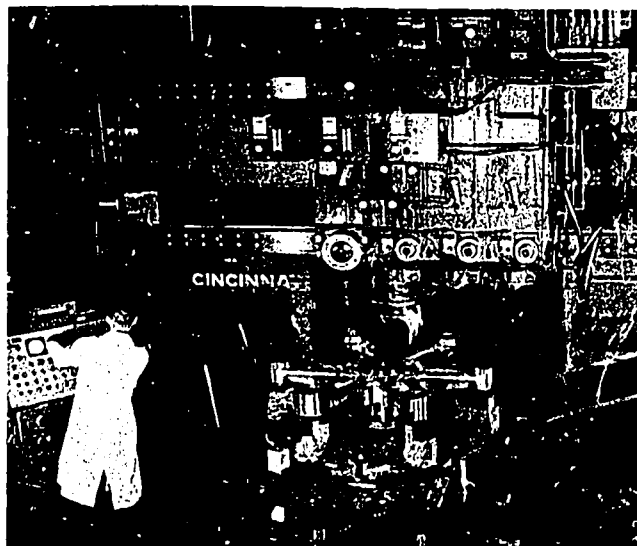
The use of tape-controlled devices like this three-spindled bridge milling machine helps to form finely detailed helicopter parts. This machine reduces manufacturing work.
